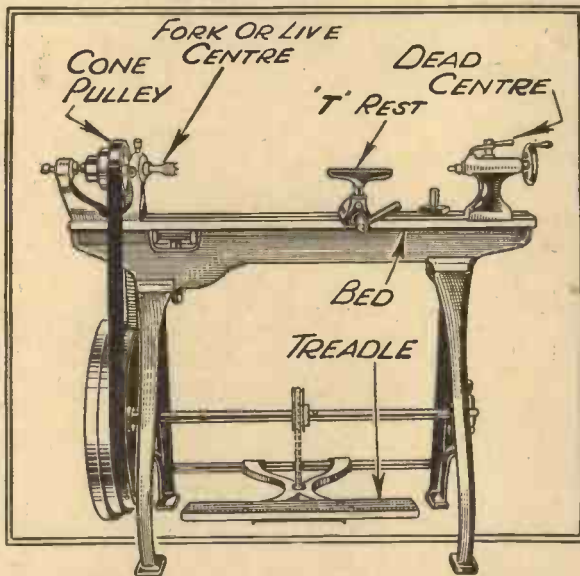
This shows the main parts of a typical lathe for woodturning.
